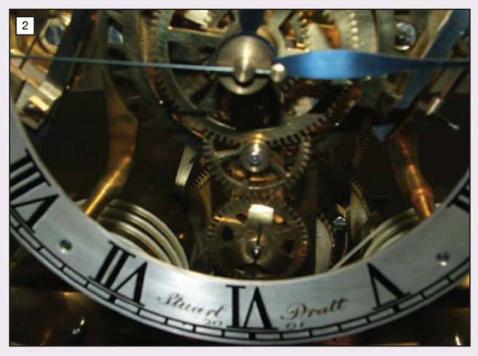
shows the wheels that transfer the centre arbor rotation to the escape arbor. Note the spring slip washer on the lower wheel that enables the hands to be adjusted
